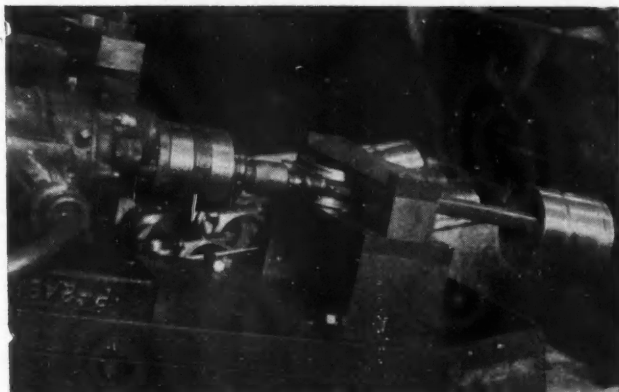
Electric drill unit for removing connection rod bolt nuts
